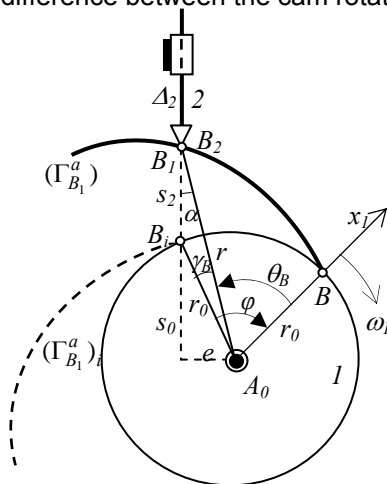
Kinematic schema of mechanism with disc-cam and translating tip / roller follower
